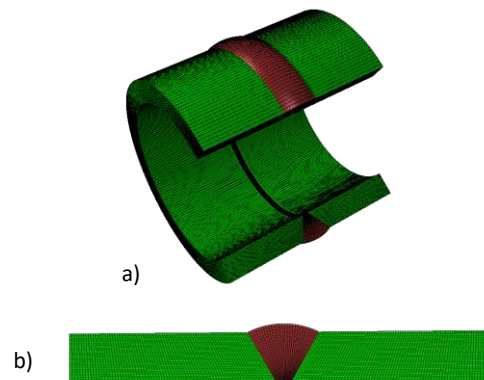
Butt-weld repairing in a pressurized pipeline system
